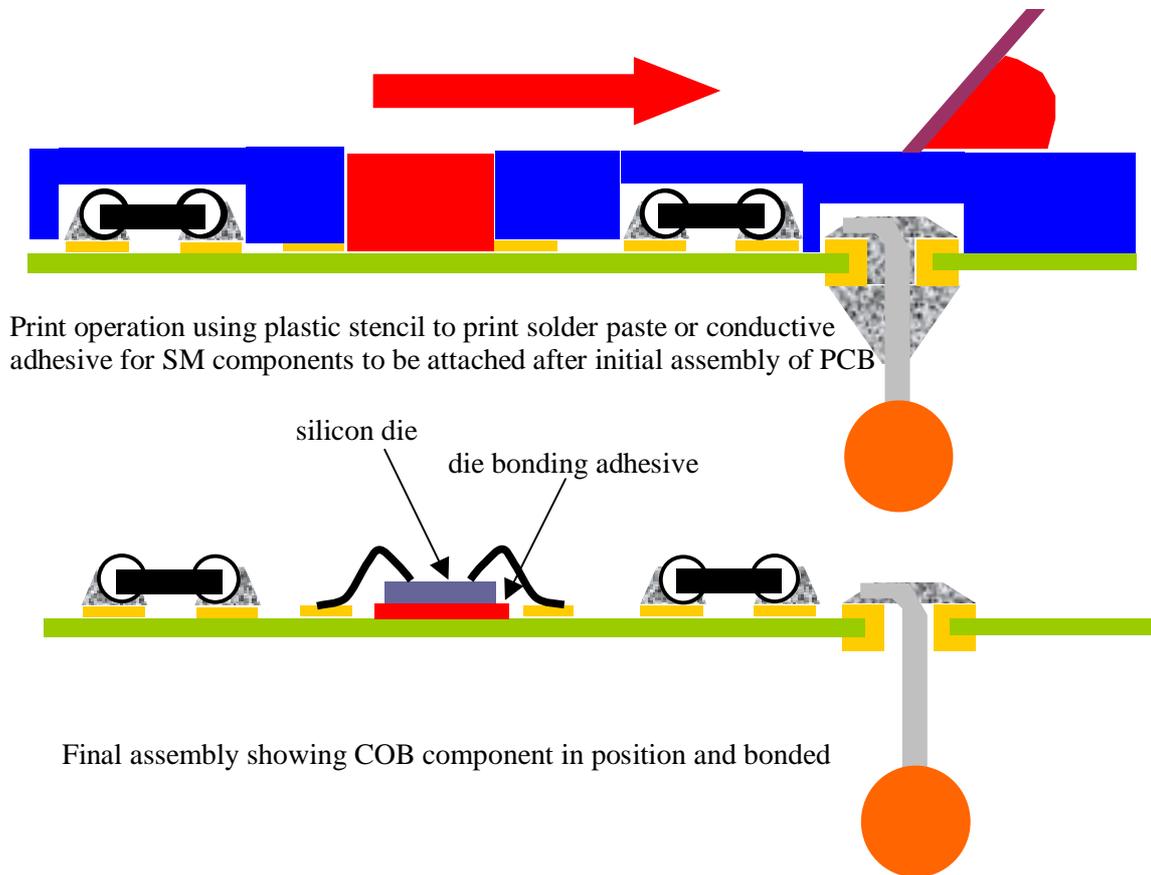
Schematic of printing of die-bonding adhesive for assembly of COB
